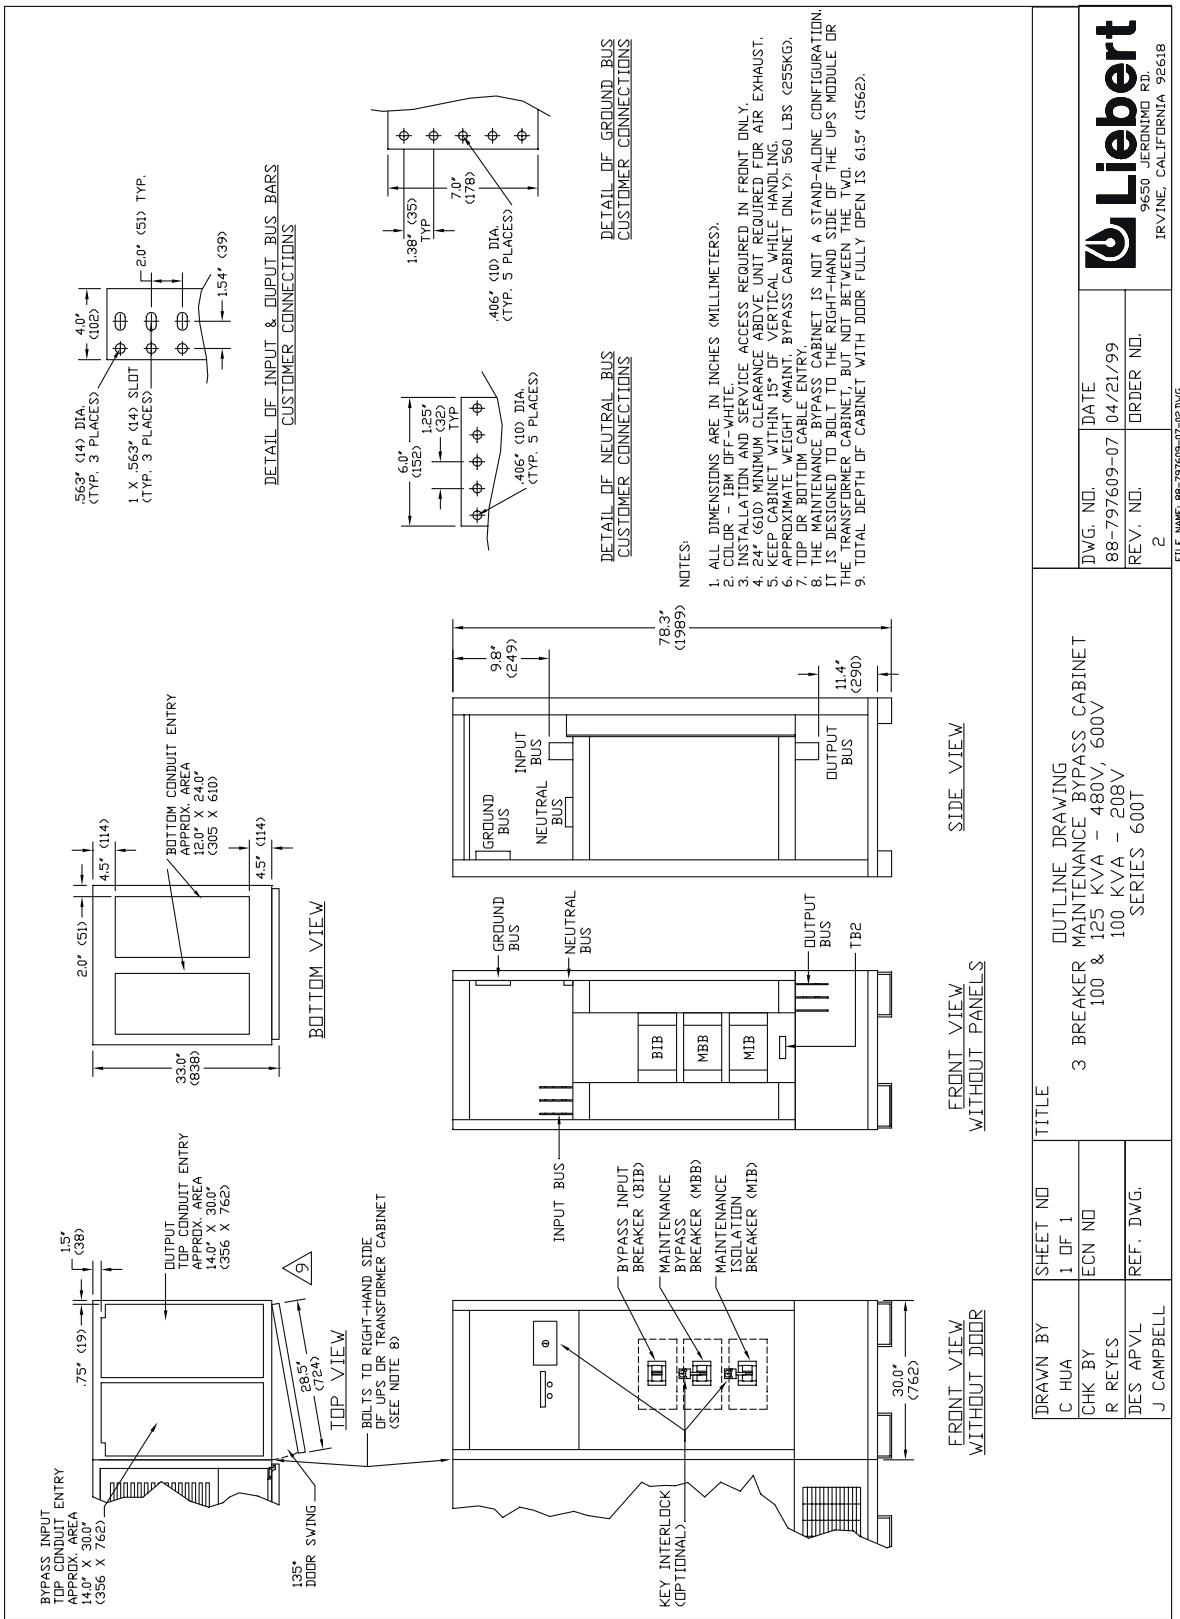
Outline Drawing, 3-Breaker MBC, 125-350 Amps
